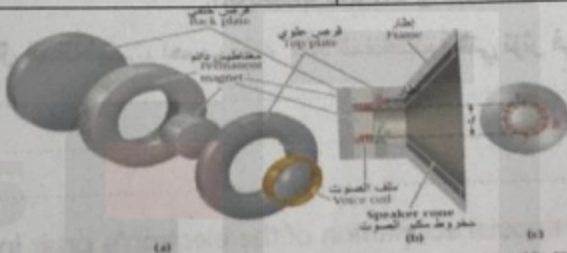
FIGURE: Schematic diagram of a loudspeaker. (a) an exploded three-dimensional view of the driver end of the loudspeaker; (b) a cross-sectional side view of the loudspeaker; (c) a front view of the driver end of the loudspeaker.
